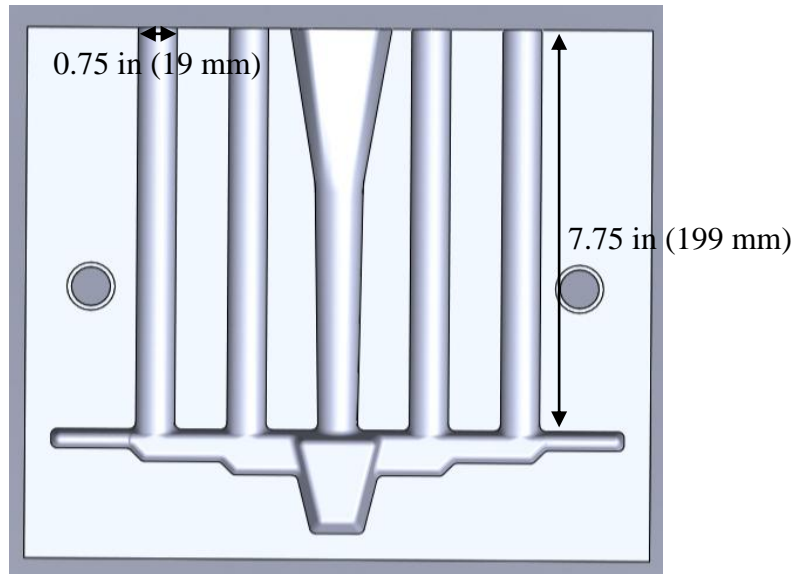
The new mold design, with the sprue in the center, creates 4 cylinders per casting which can be machined into tensile bars. The bar diameter is slightly larger than the finished grip diameter of 0.625 in (16 mm).
